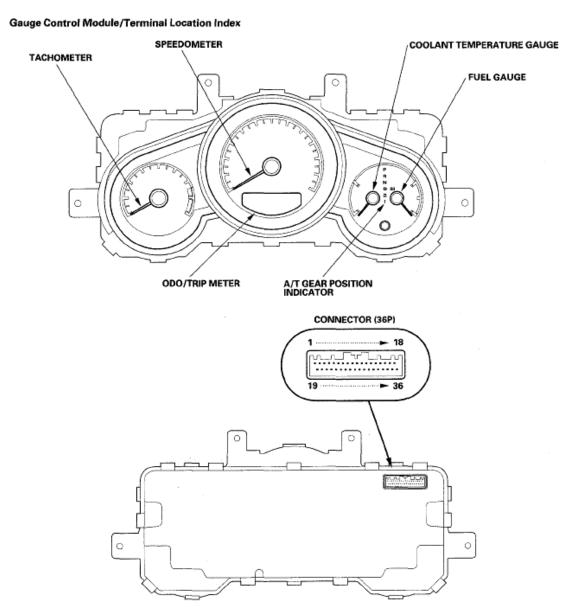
Identifying Gauge Control Module/Terminal Location Courtesy of AMERICAN HONDA MOTOR CO., INC.
